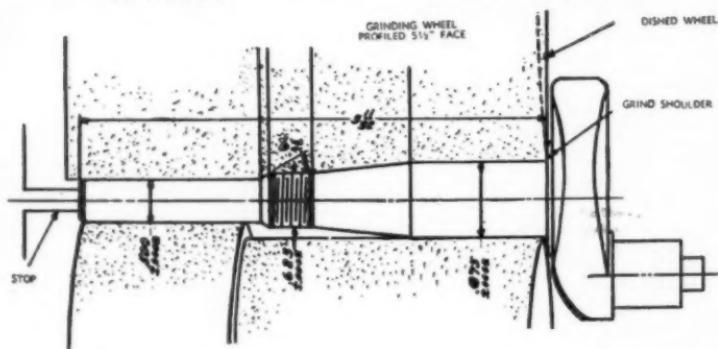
The diameters are ground by infeed with a slight thru feed to the left to enable the dished wheel to grind the shoulder.
